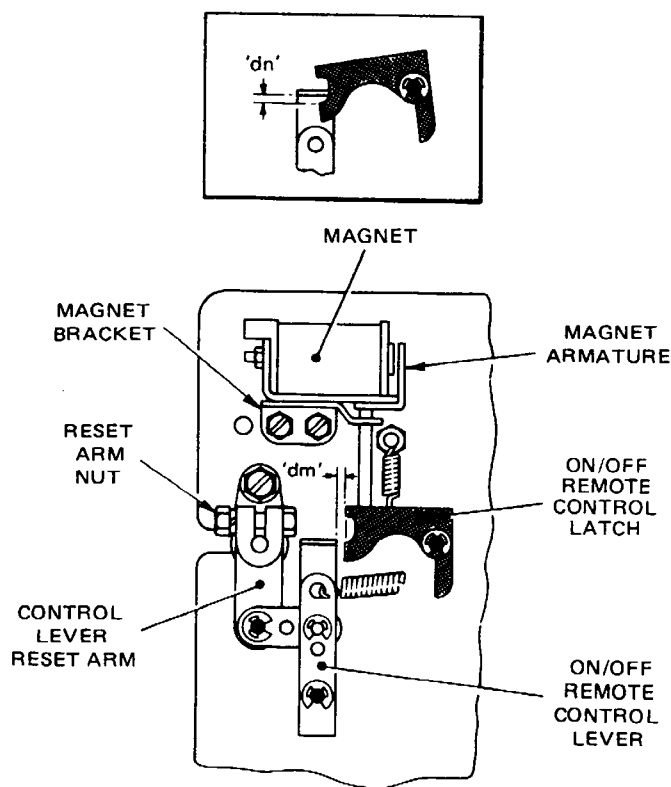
ON/OFF REMOTE CONTROL LEVER ASSEMBLY
